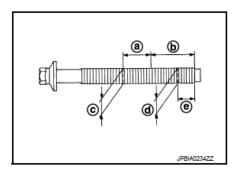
Identifying Lower Cylinder Block Bolt Outer Diameter Measuring Points Courtesy of NISSAN MOTOR CO., U.S.A.
